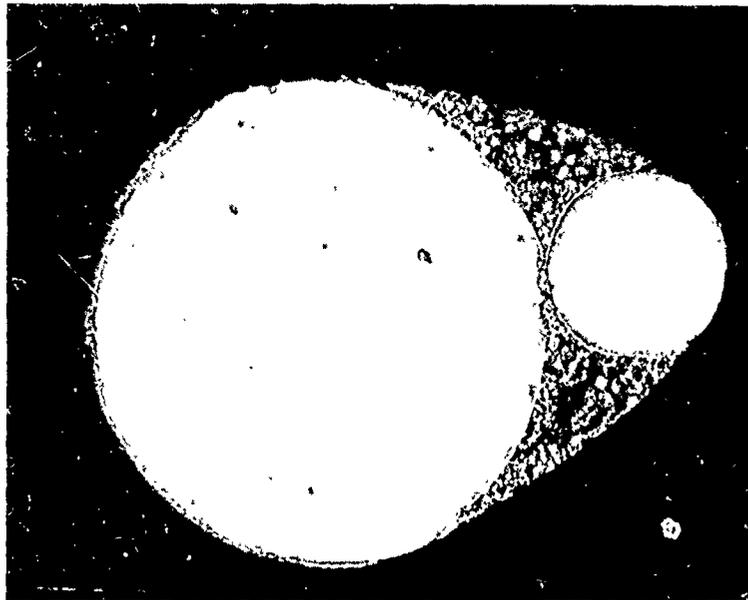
Microsection of soldered AWG 44 wire to AWG 36 wire, 500X.
